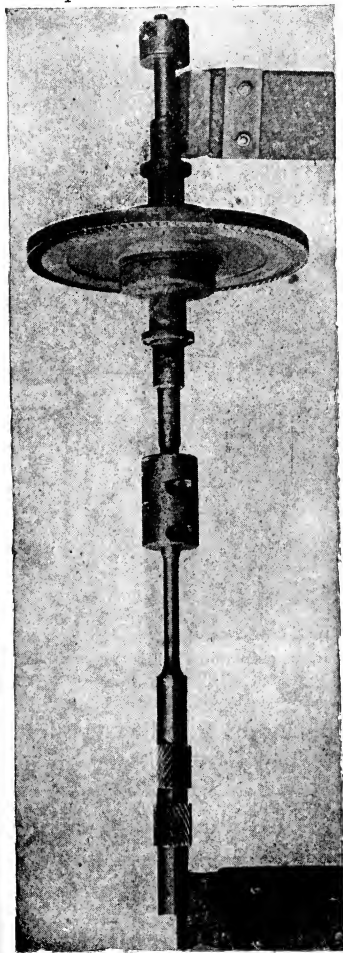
,395. — Westinghouse, impulse type single rotor, showing sealed glands and gear pinion.
